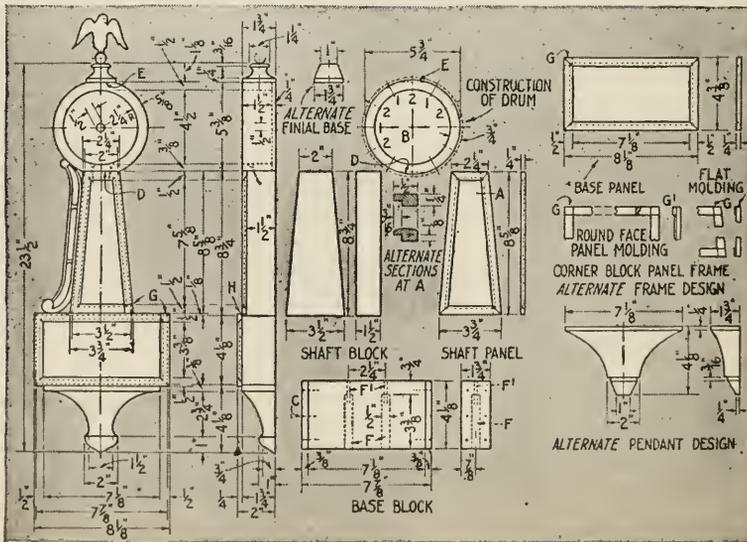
Front and side views of a banjo clock case; construction of drum; the shaft and base clocks; panels and moldings; base and pendant designs.
